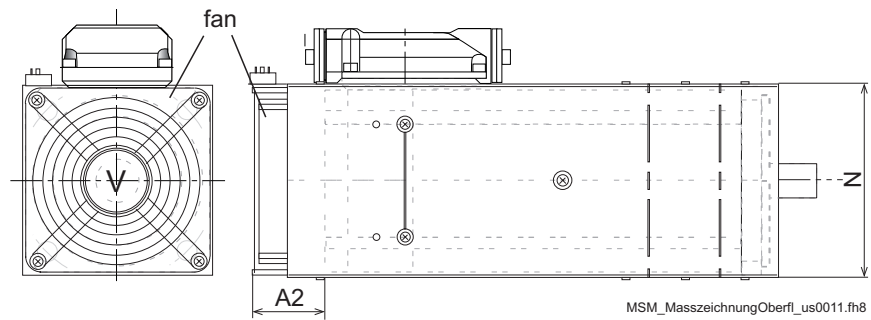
Dimensional drawing of SM-Motor with surface ventilation
